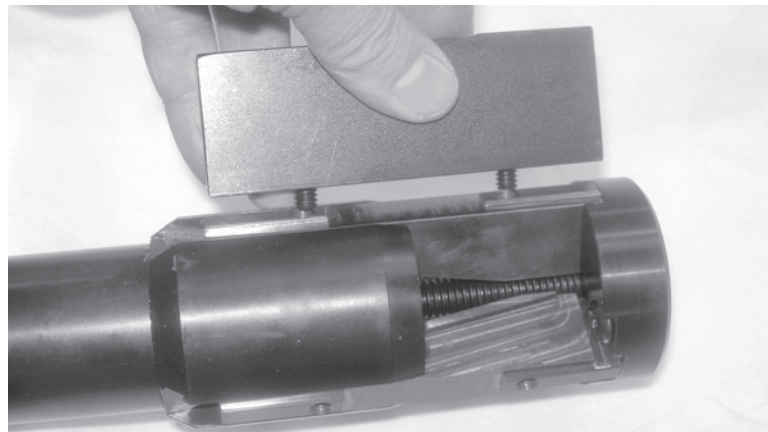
The screws in the clamp leg attach it to the chuck leg on the mandrel.
